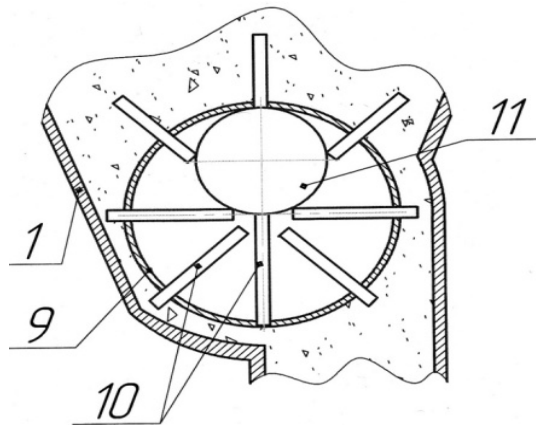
Weigh the sowing machine 1 - bunker; 9 - rotors; 10 - plate; 11 - copiers.
